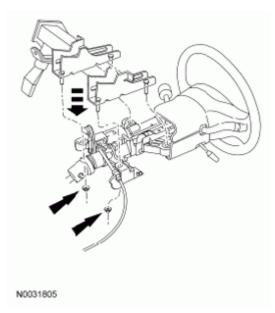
Locating Steering Column-To-Cross Car Beam Nuts Courtesy of FORD MOTOR CO.
